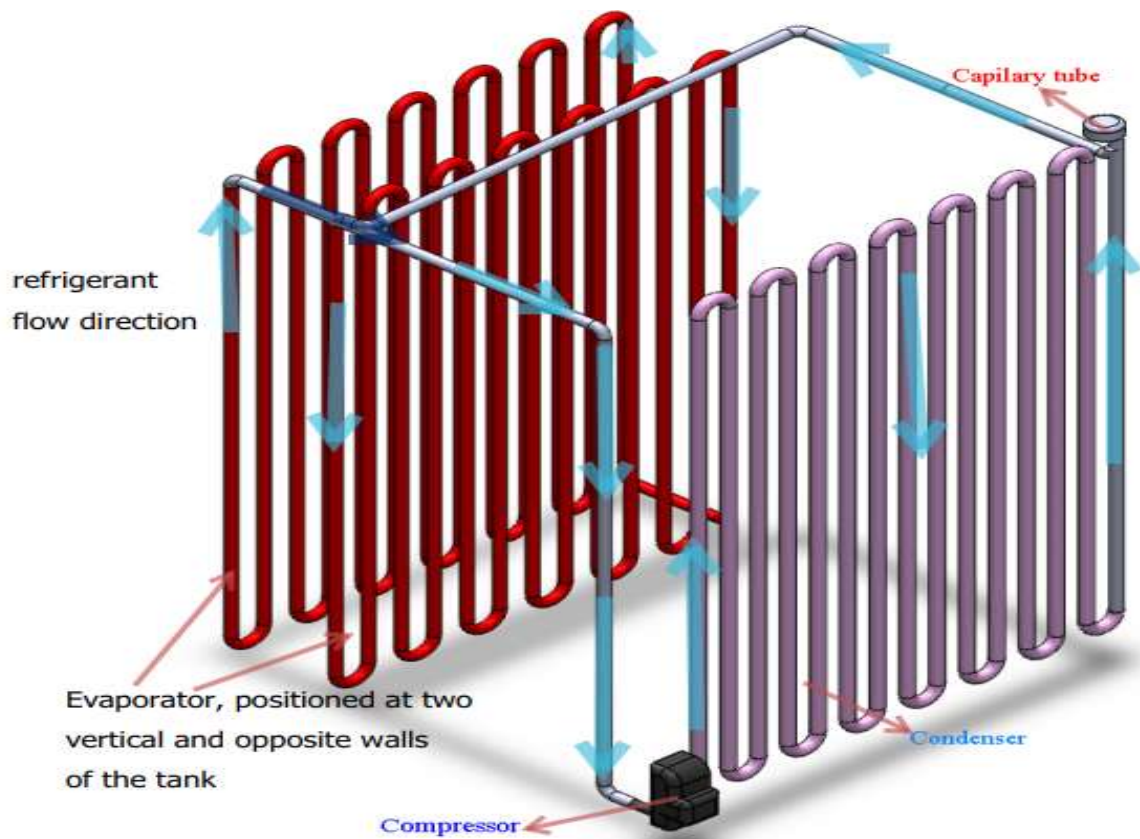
Evaporator, Condenser, Compressor and Capillary tube assembly
